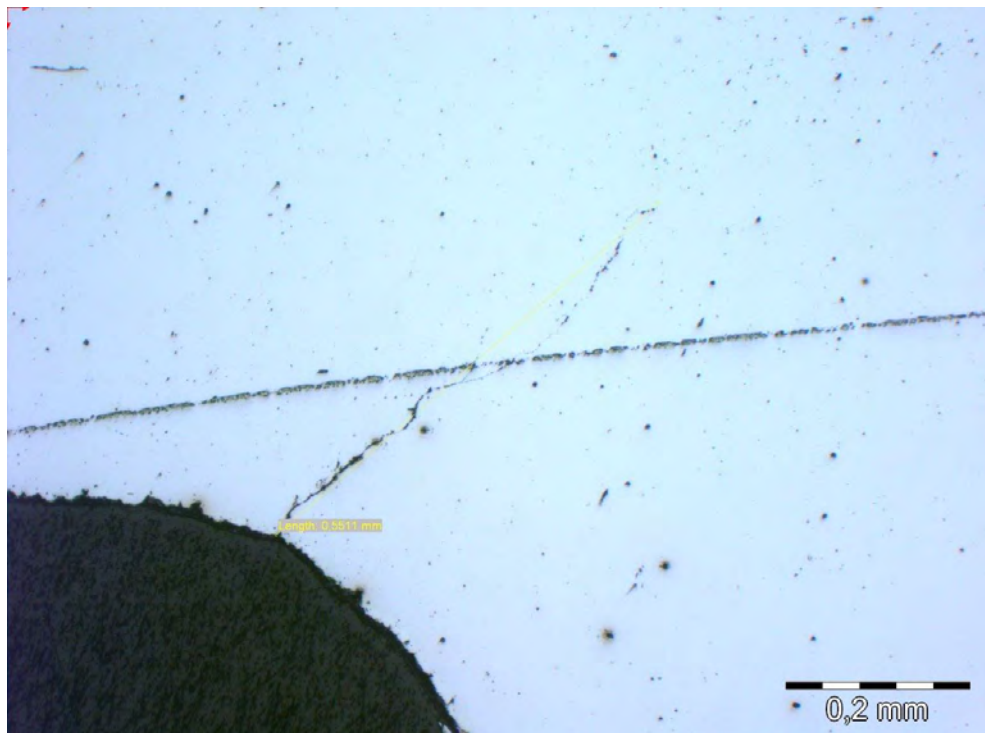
Cut two in crack at segment A, first ridge on barrel no. 14389
